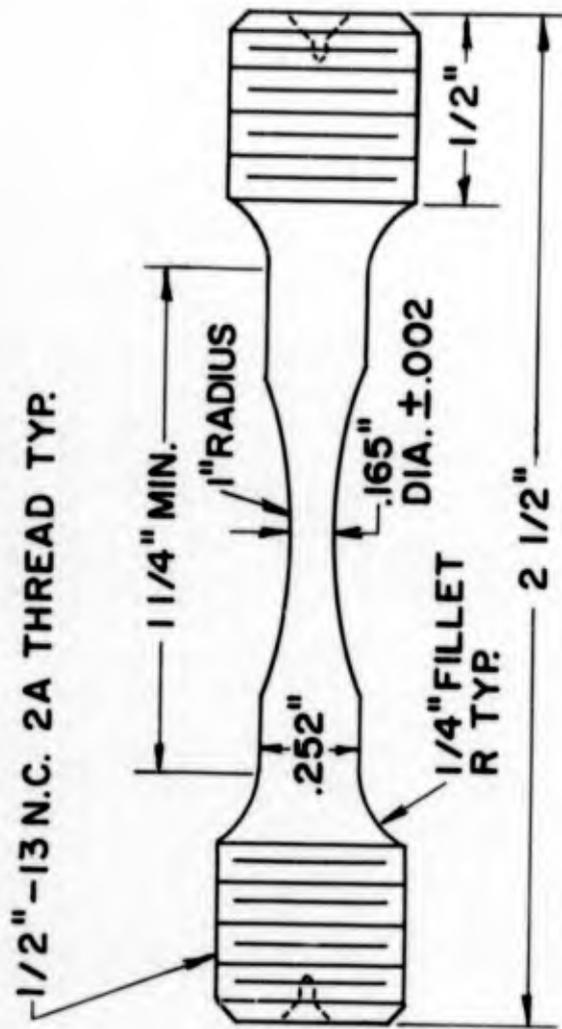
Synthetic Weld Thermal Cycle Tensile Specimen Geometry.
